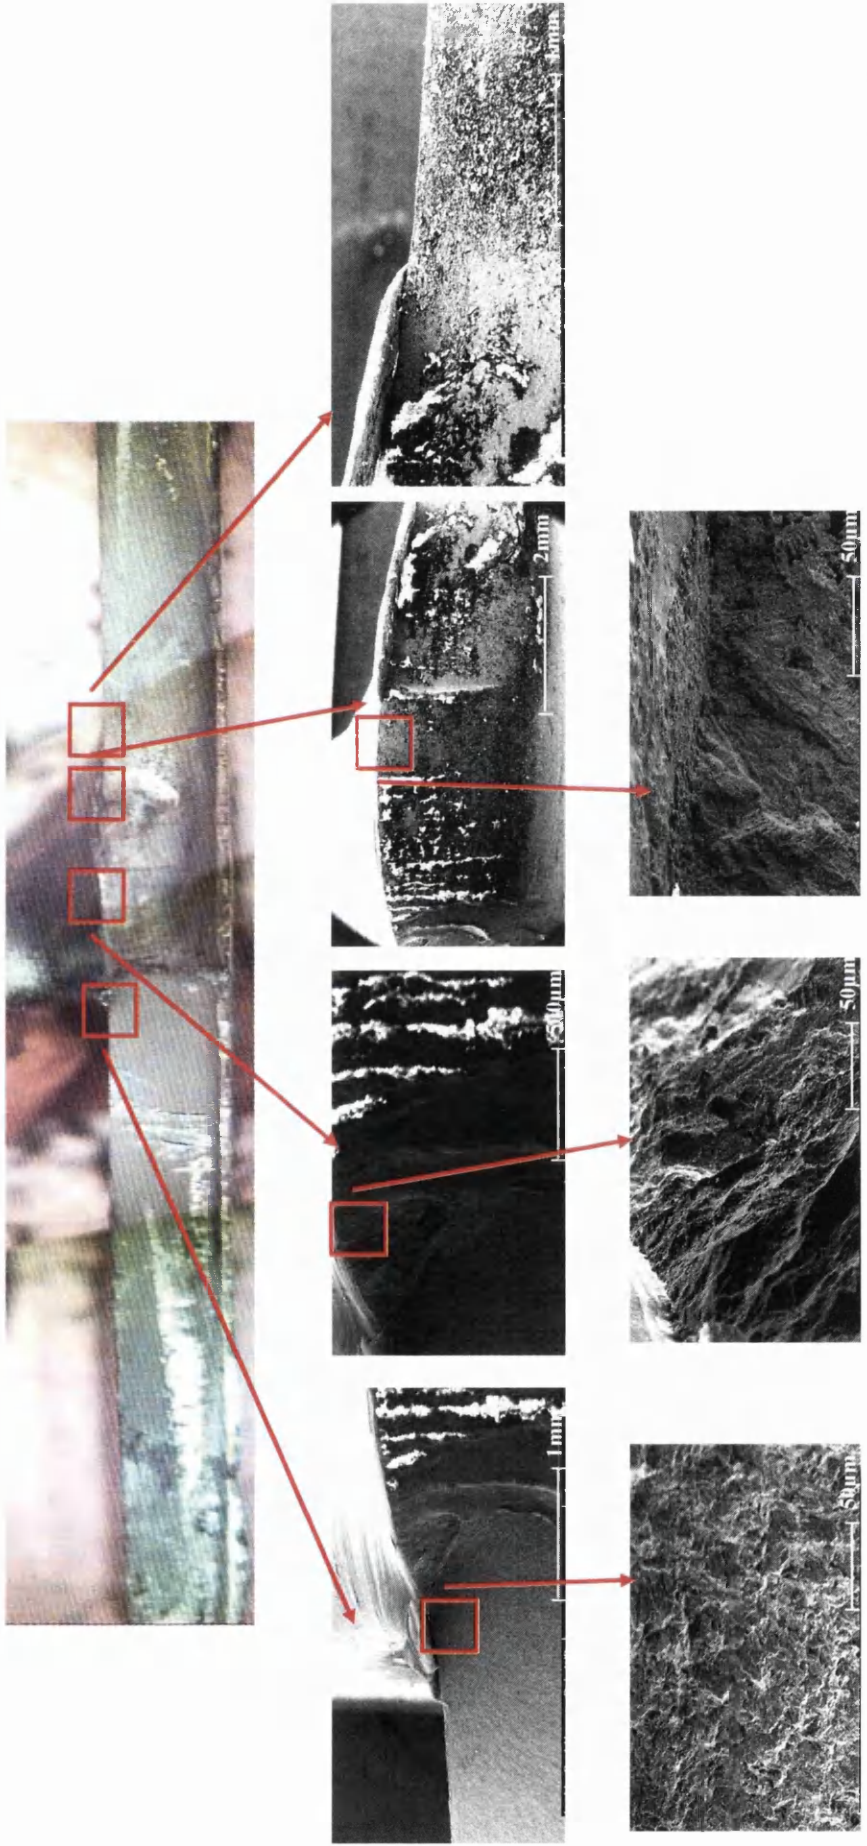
Typical Fracture Surface for Variable Amplitude SAE Bracket Load-Time History GM8 Weld Throat Failure – Weld View
